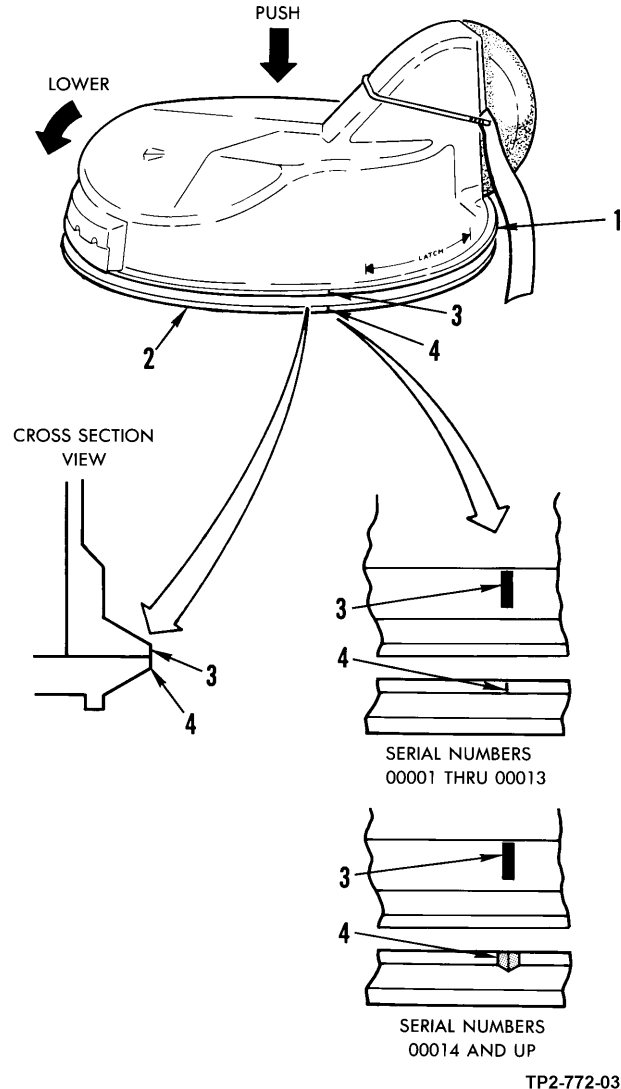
Shroud Alinement with PNVS NSA Mounting Base
